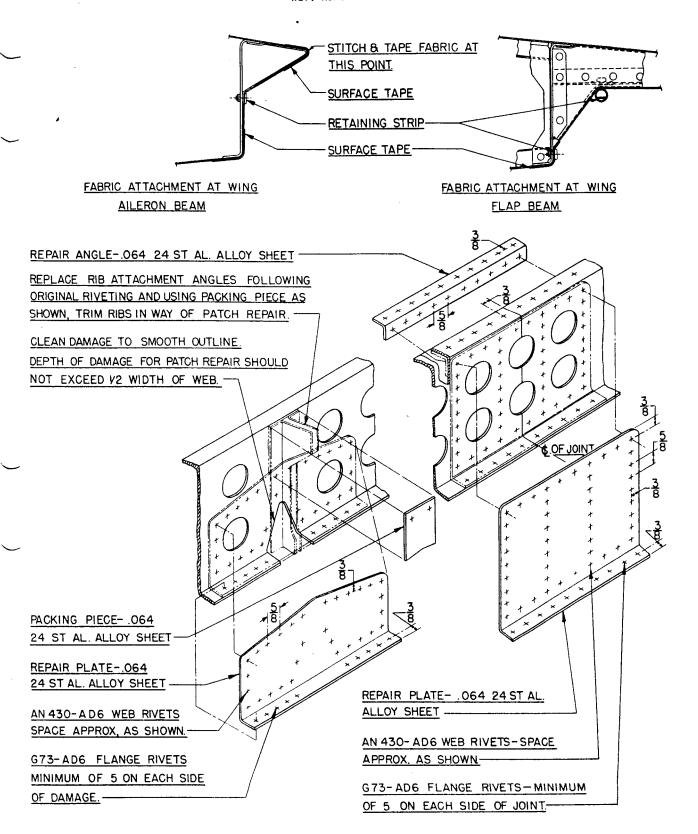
Wing Flap and Aileron Support Beam Repairs
